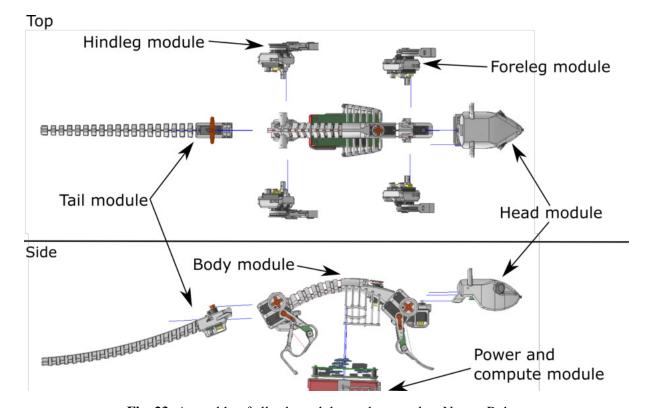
Assembly of all sub modules to the complete Nermo Robot.
